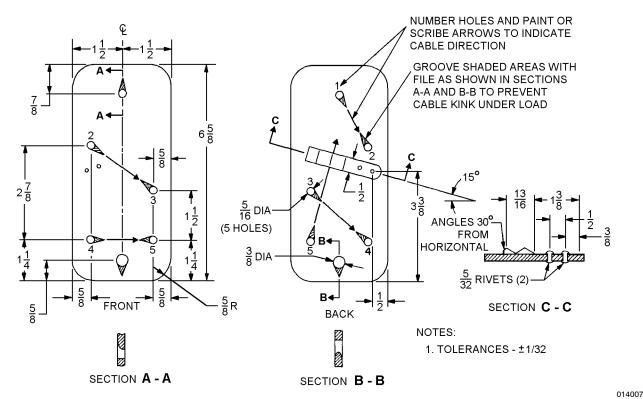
Fabrication of Hoist Quick Splice Plate
